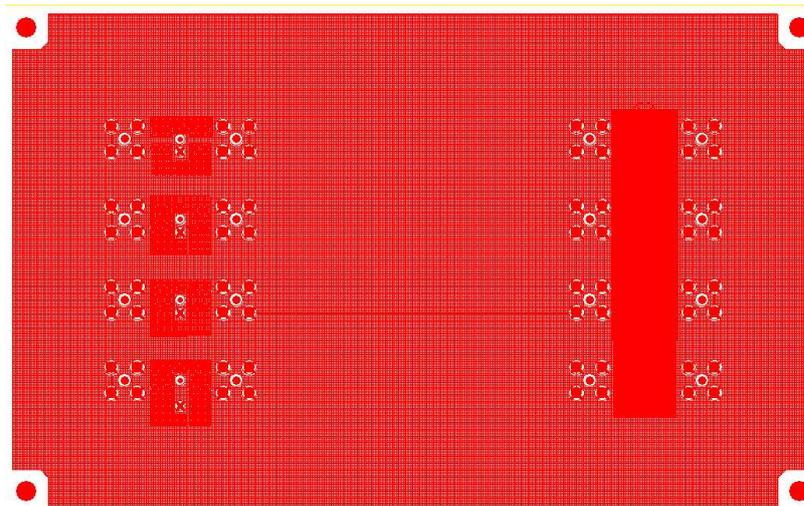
The Inductance of Capacitor: Packaging Bare Board (Bottom View)
